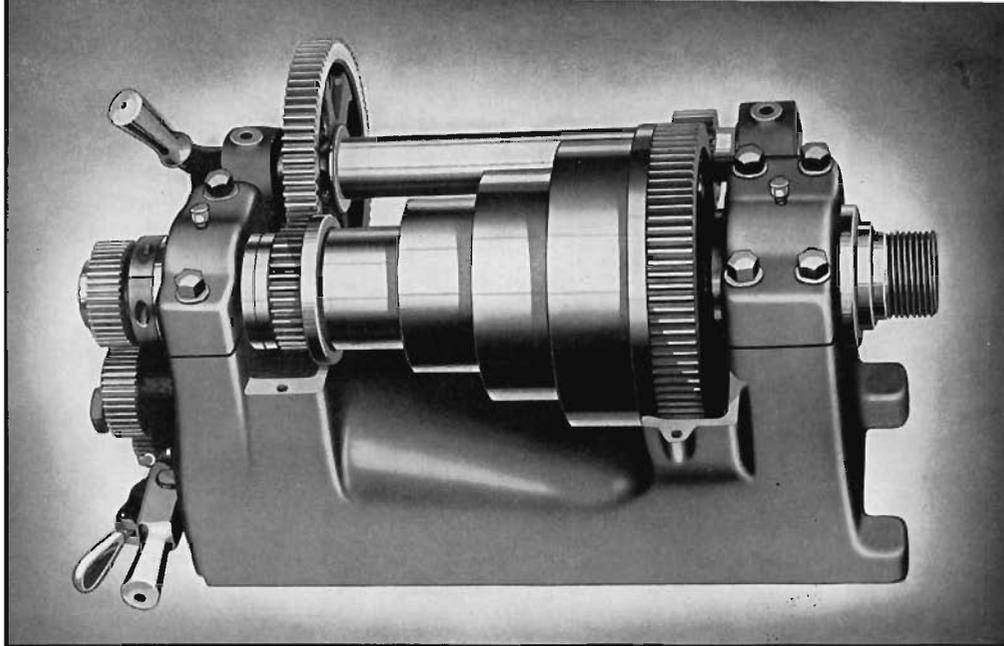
The Lathe Headstock with Gear Guards Removed to Show Back Gears.
